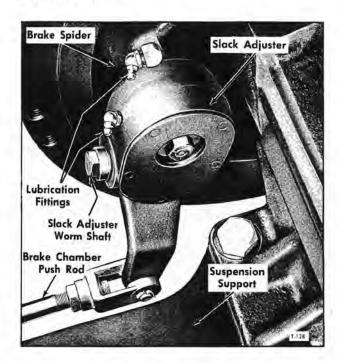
Slack Adjuster and Camshaft Mounted On Rear Axle
